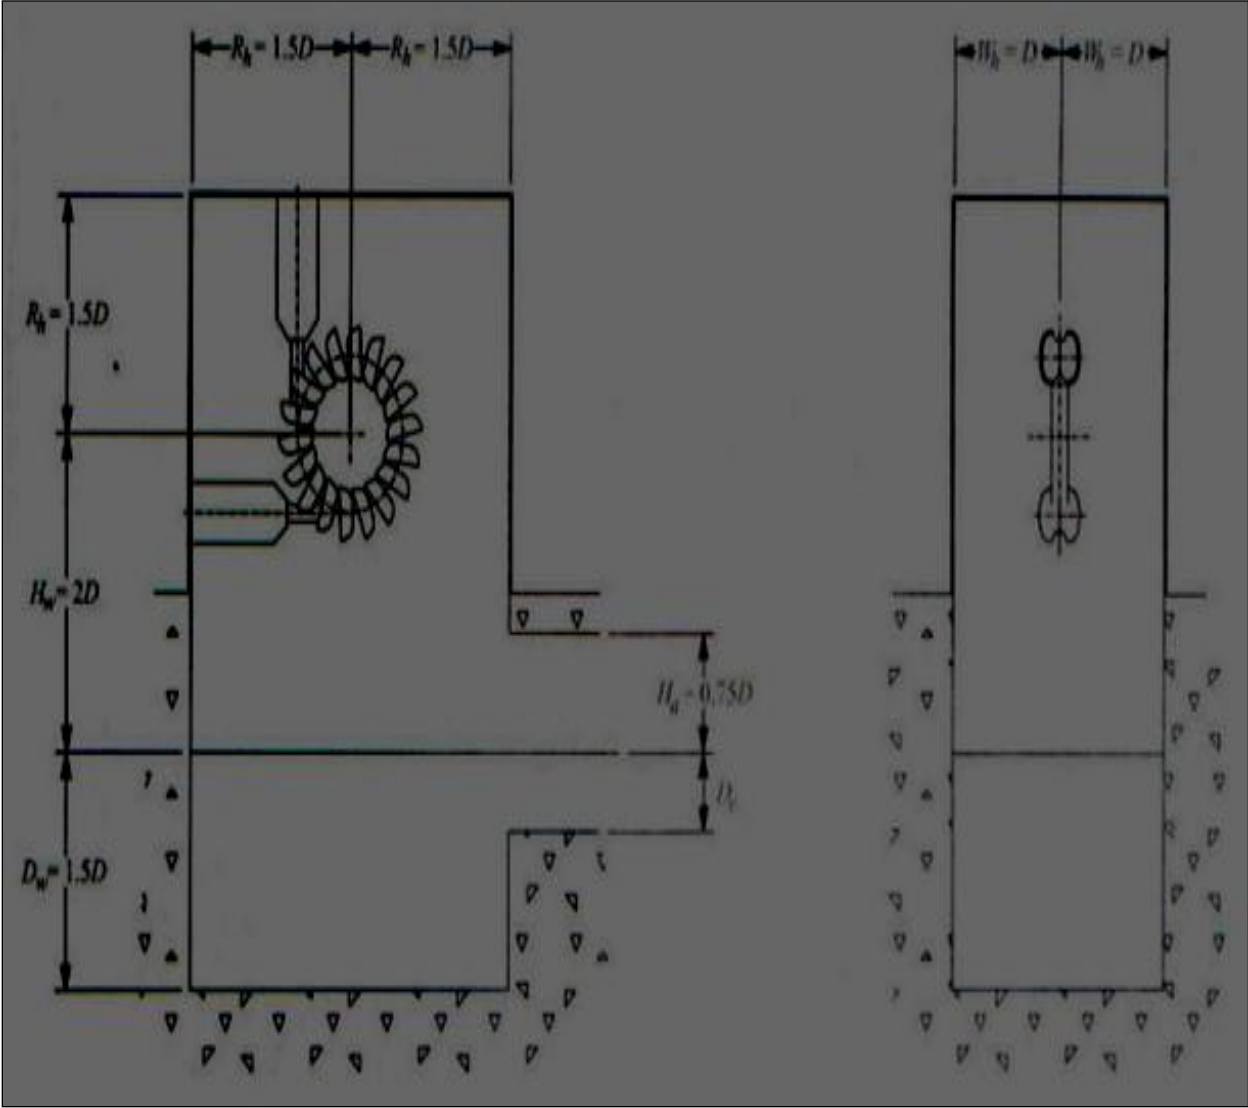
Dimensions of the Turbine Parts to fabricate casings [Jermey Thake].
